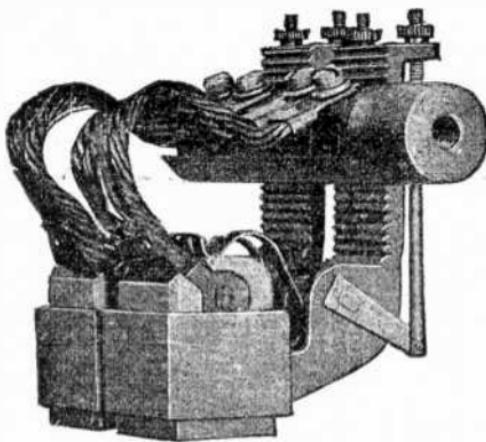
,050.—*Westinghouse synchronous converter construction 10. A.C. brush holder.* They are of the sliding shunt type arranged for mounting on a stud. The spring and tension adjusting mechanism being similar to that on the d.c. holder except that a thumb nut micrometer adjustment is employed, which gives an accessible and ready means of adjustment of brush pressure.
